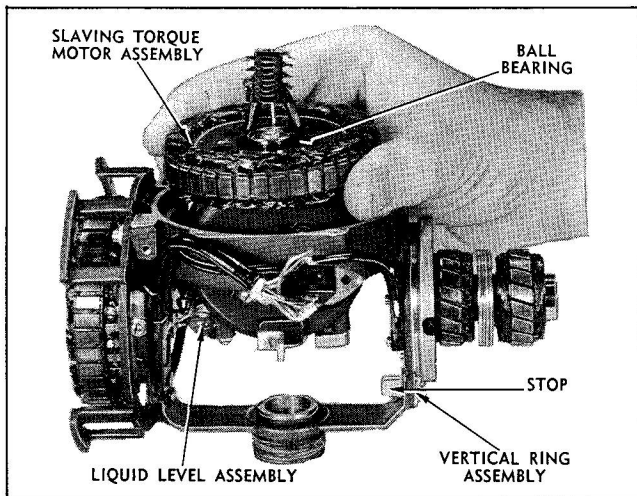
Removing Gyro and Slaving Torque Motor Assembly from Vertical Ring Assembly
